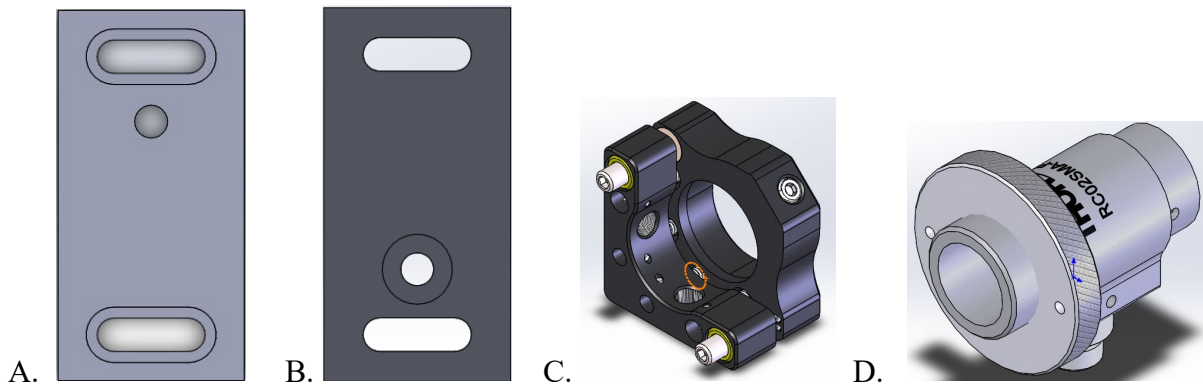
Optical components and fixture. A.) Top view of optics base, b.) bottom view of optics base, c.) half-inch diameter kinematic mirror mount, and d.) reflective collimator.
